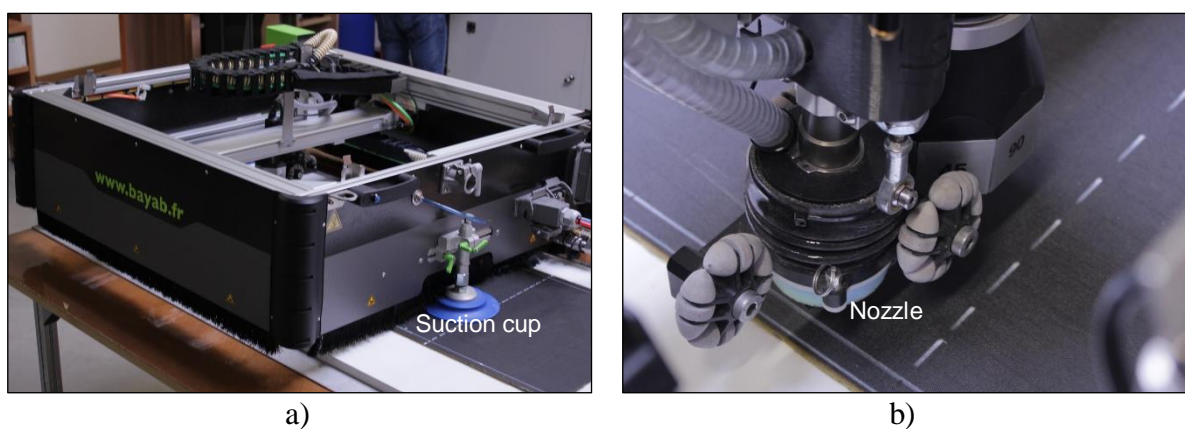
Bayab Industries abrasive water jet machine Reply.5 with a) levelled machine and b) nozzle.
